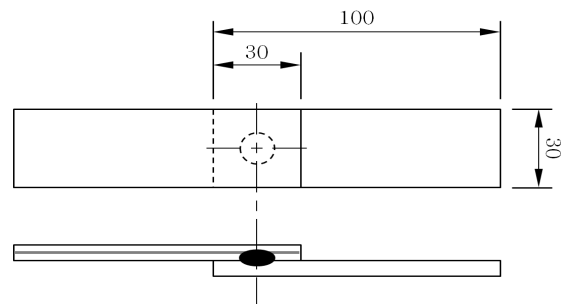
Schematic and drawing of the tensile-shear specimen (unit: mm)
